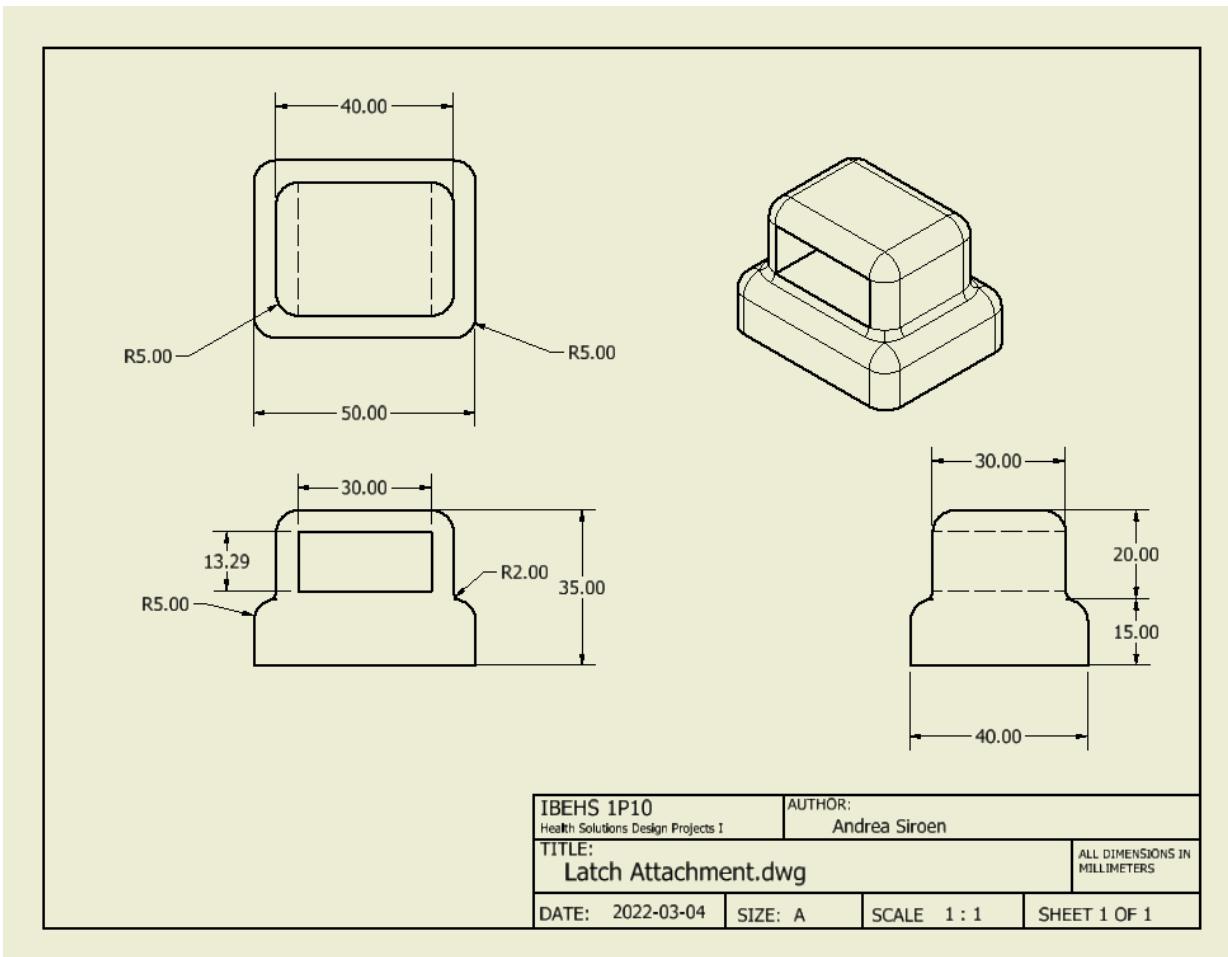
Latch component for latch rod to lock into when in extended position; is fixed to gate banister
